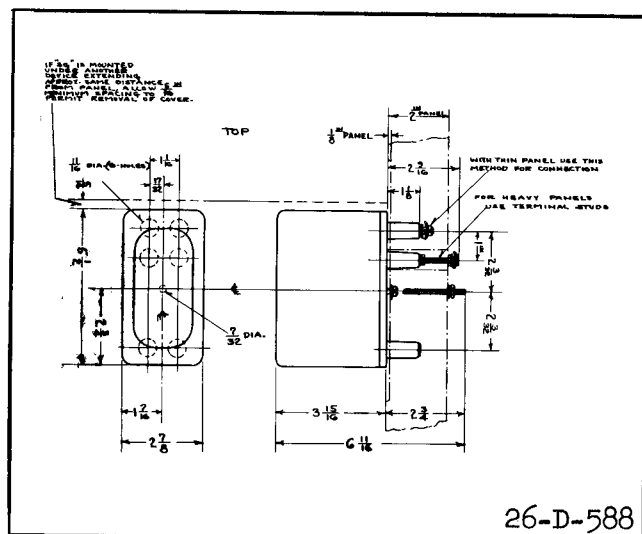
Outline & Drilling Plan for the Type PS-4 Auxiliary Unit in the Projection Molded Case.
